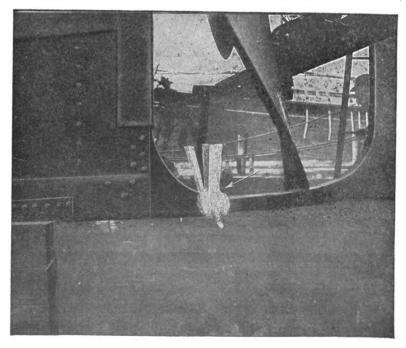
Broken Stern Post of Boat Welded by Thermit Process
